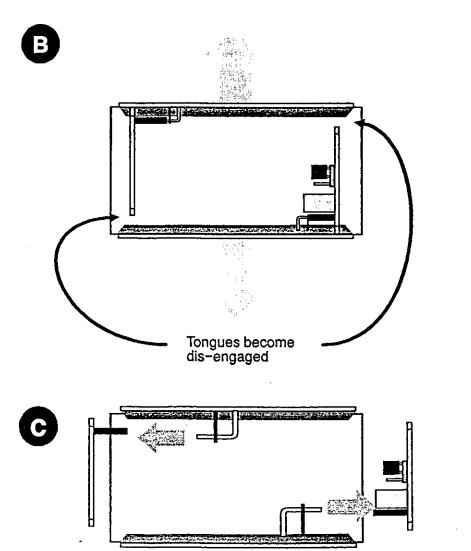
Removing the Output 2/Output 3 Option PCBs
